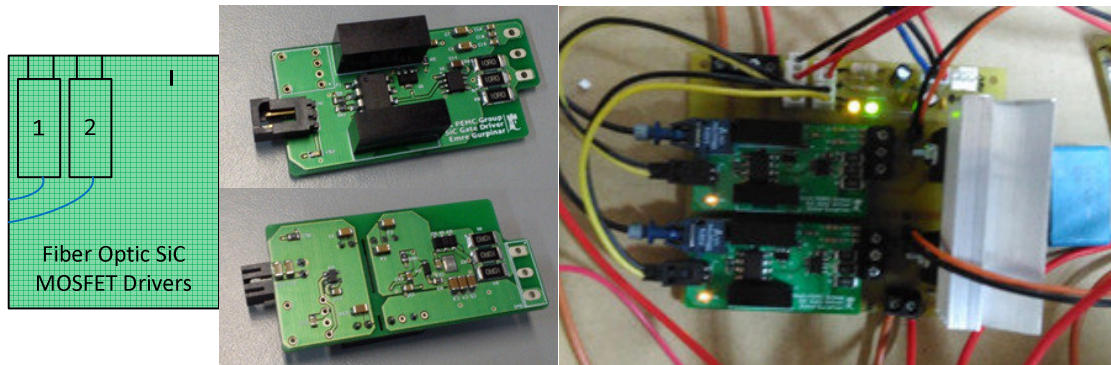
Fiber optic drivers PCB, Top and Bottom view and, the assembled drivers in the half-bridge inverter PCB
